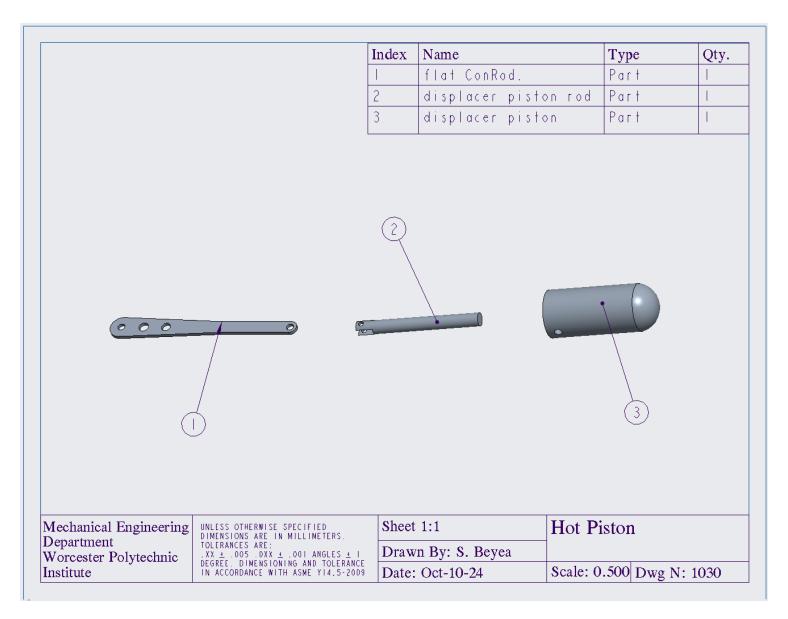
exploded view of the hot piston assembly (with balloons and BOM).
